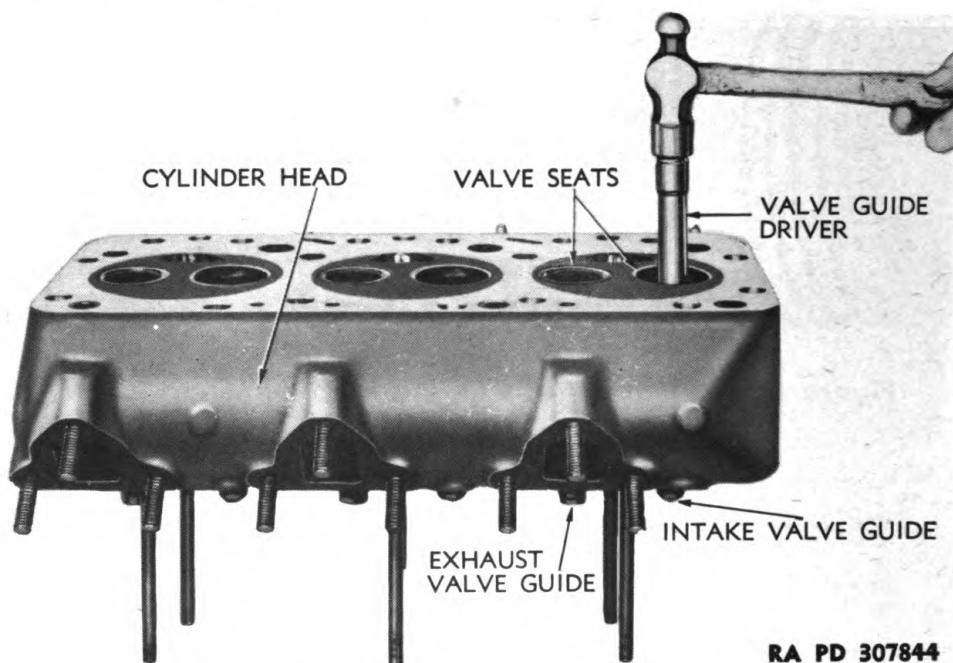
Valve Guide Removal, With Tool 41-R-2377-600
